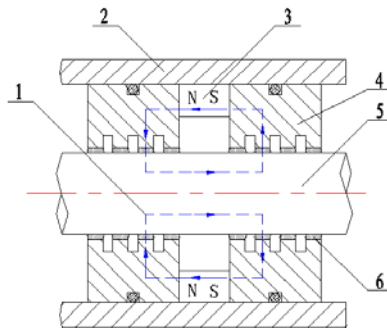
The typical structure of monaxial magnetic fluid rotary seals: 1- Magnetic circuit; 2- Housing; 3- Permanent magnetic ring; 4- Pole piece; 5- Rotary shaft; 6- Magnetic fluid
